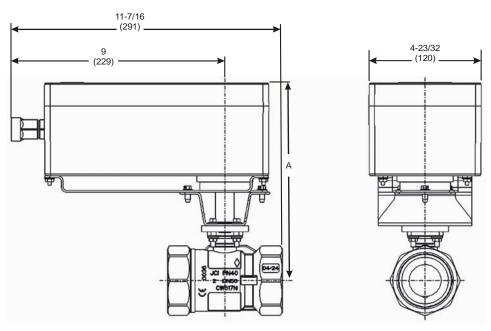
Weather Shield Enclosure Dimensions, in. (mm) (See Table 2.)
